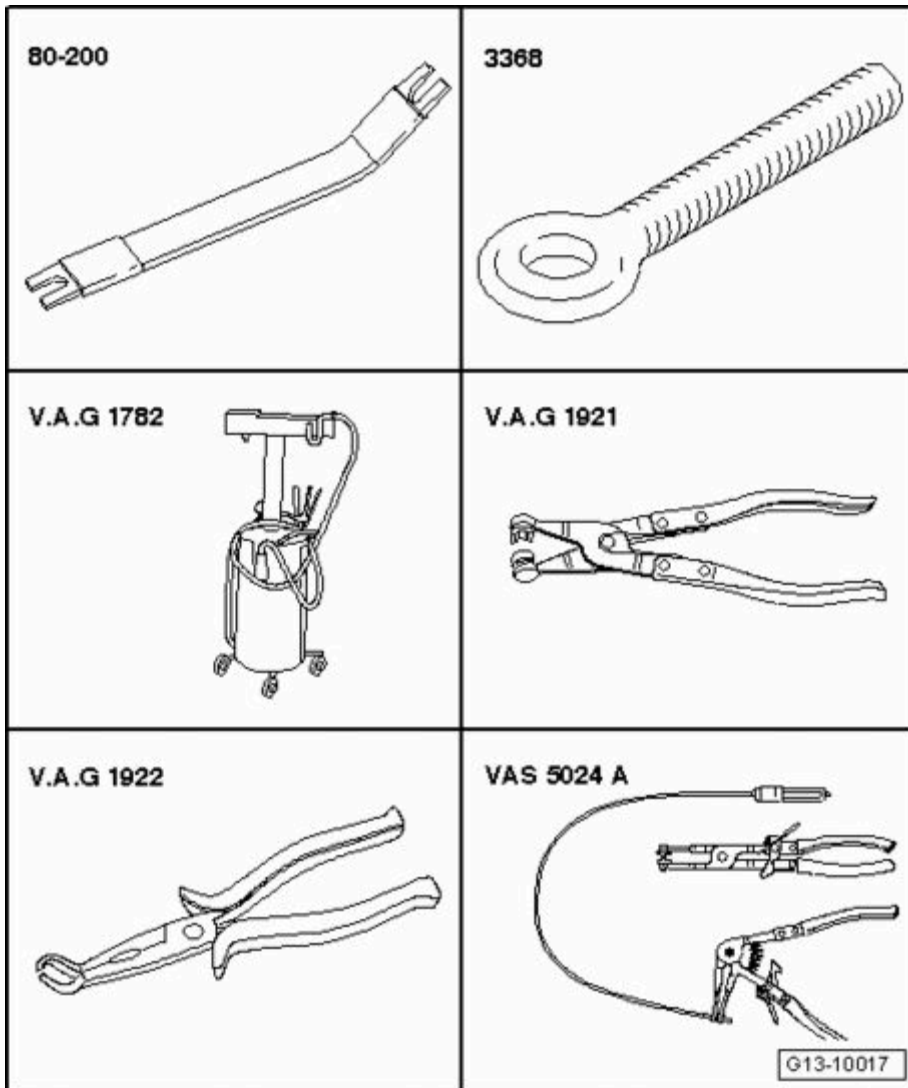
Identifying Special Tools - Engine, Removing (1 Of 2)
